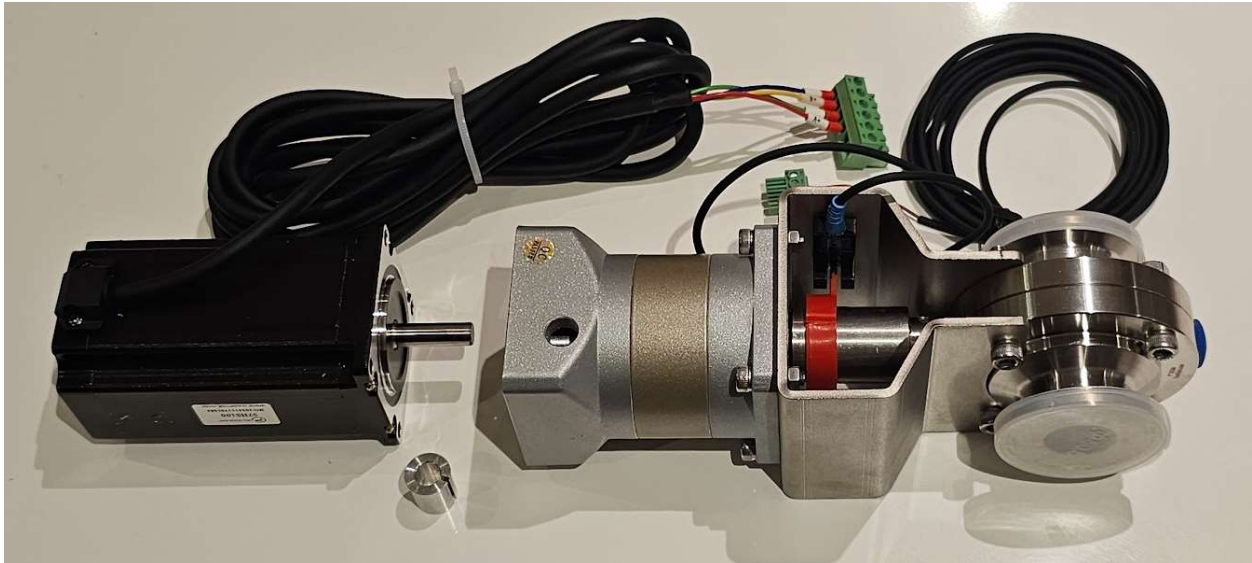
The assembly comes with gearbox, position sensor and valve assembled into one unit. The stepper motor must be fitted to the gearbox
